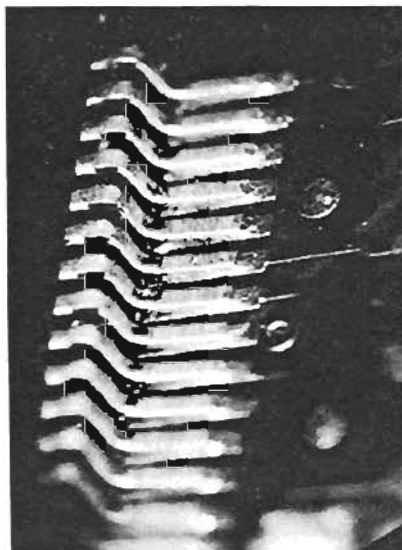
Close-up of gull-winged surface mounted component, soldered to a printed circuit board (Vision Engineering)
